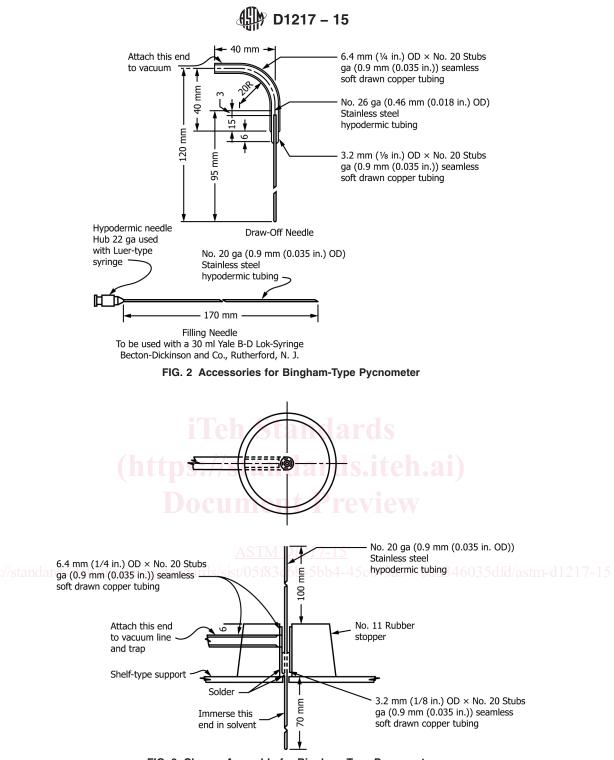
Cleaner Assembly for Bingham-Type Pycnometer
